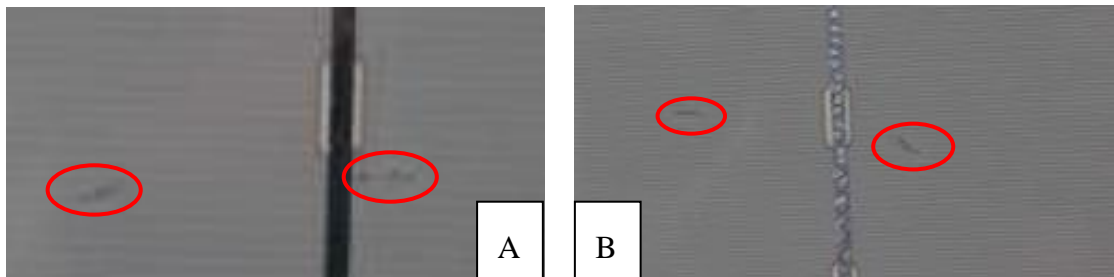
Detailed view of the Module 6.3.3.1. Red circles show defects (bubbles) found in the rear side of the sample.
